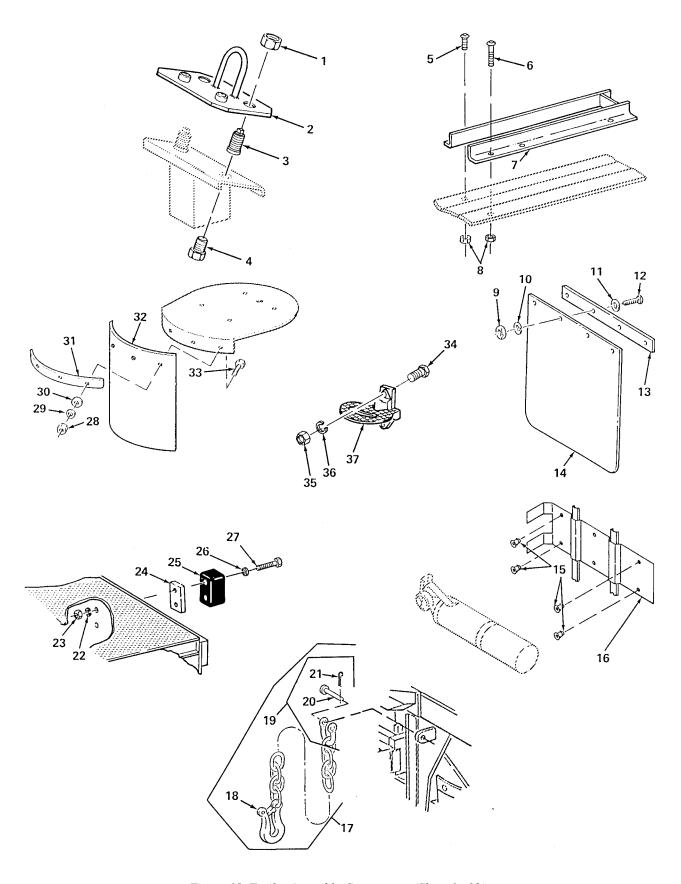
Trailer Assembly Components (Sheet 1 of 2)
